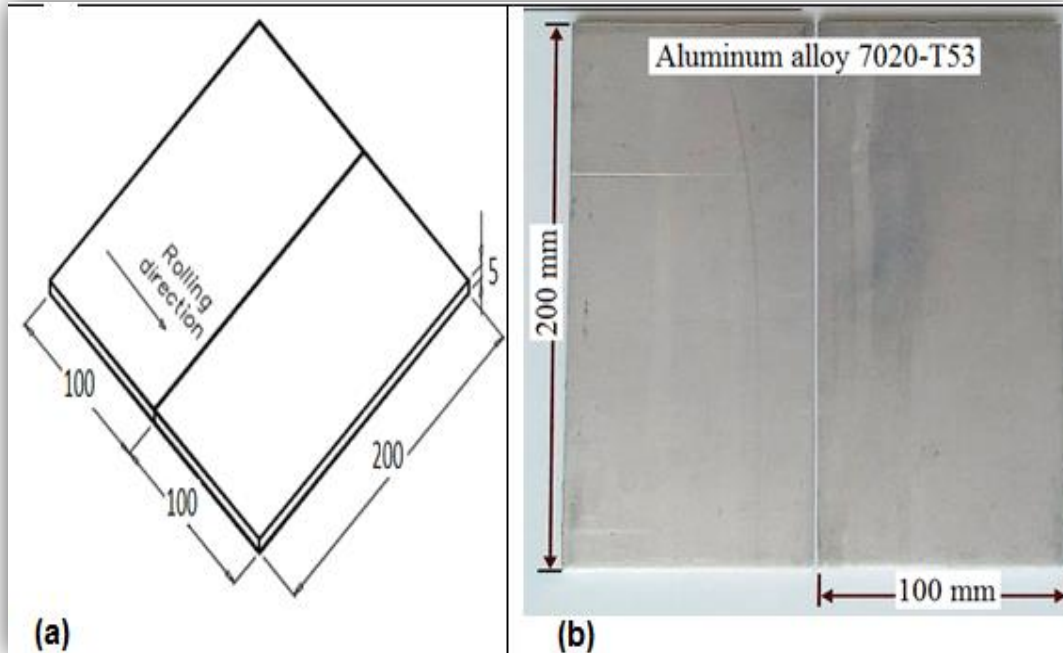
(a) Size and shape of aluminum alloy (AA7020-T53) rectangular-butt- joints used for FSW process. (b) Sheets preparation for welding. All dimensions in mm.
